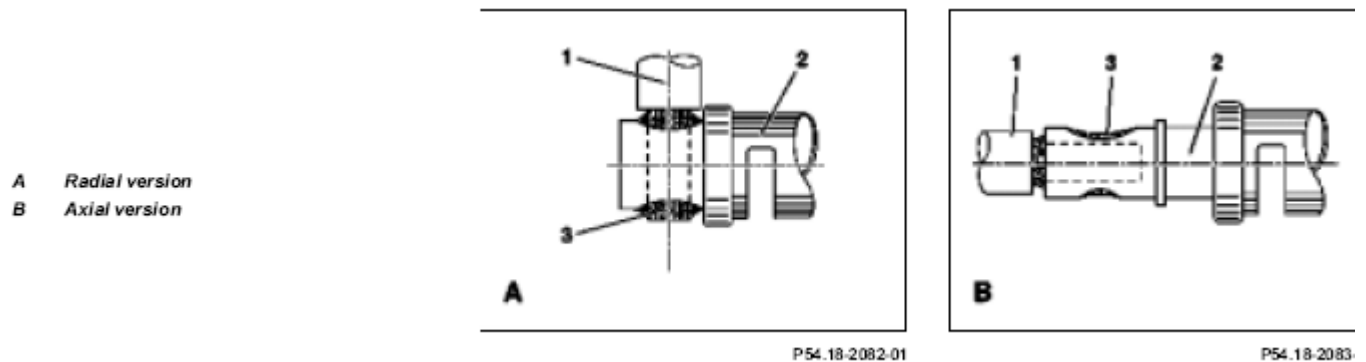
Repairing Cable Harness By Soldering (2 Of 2)
